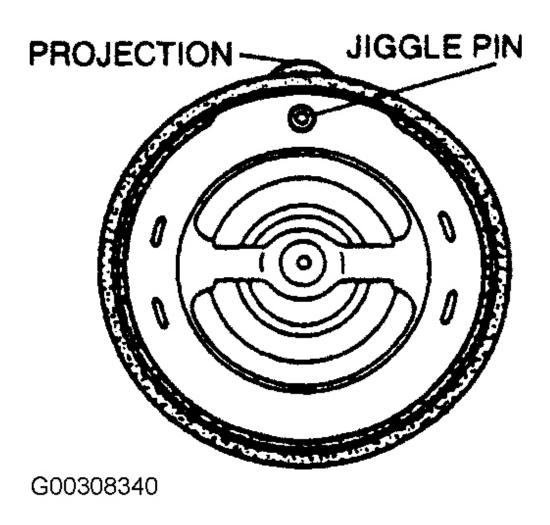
Verifying Thermostat Jiggle Pin Is Aligned Courtesy of MAZDA MOTORS CORP.
